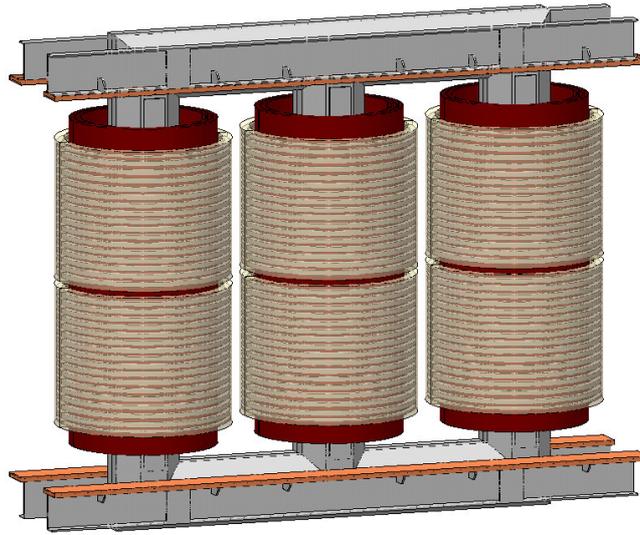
geometry of the 72kV dry-type transformer unit showing core, core-clamps, clamp-shields and windings.
